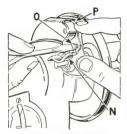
Adjustment of Bobbin Winder Loosen adjusting screw 0, Fig. 12. With forefinger, push back upper end of slotted plate P as far as it will go, as shown in Fig. 12, and at the same time, press bobbin winder pulley against hub of hand wheel. Tighten adjusting
